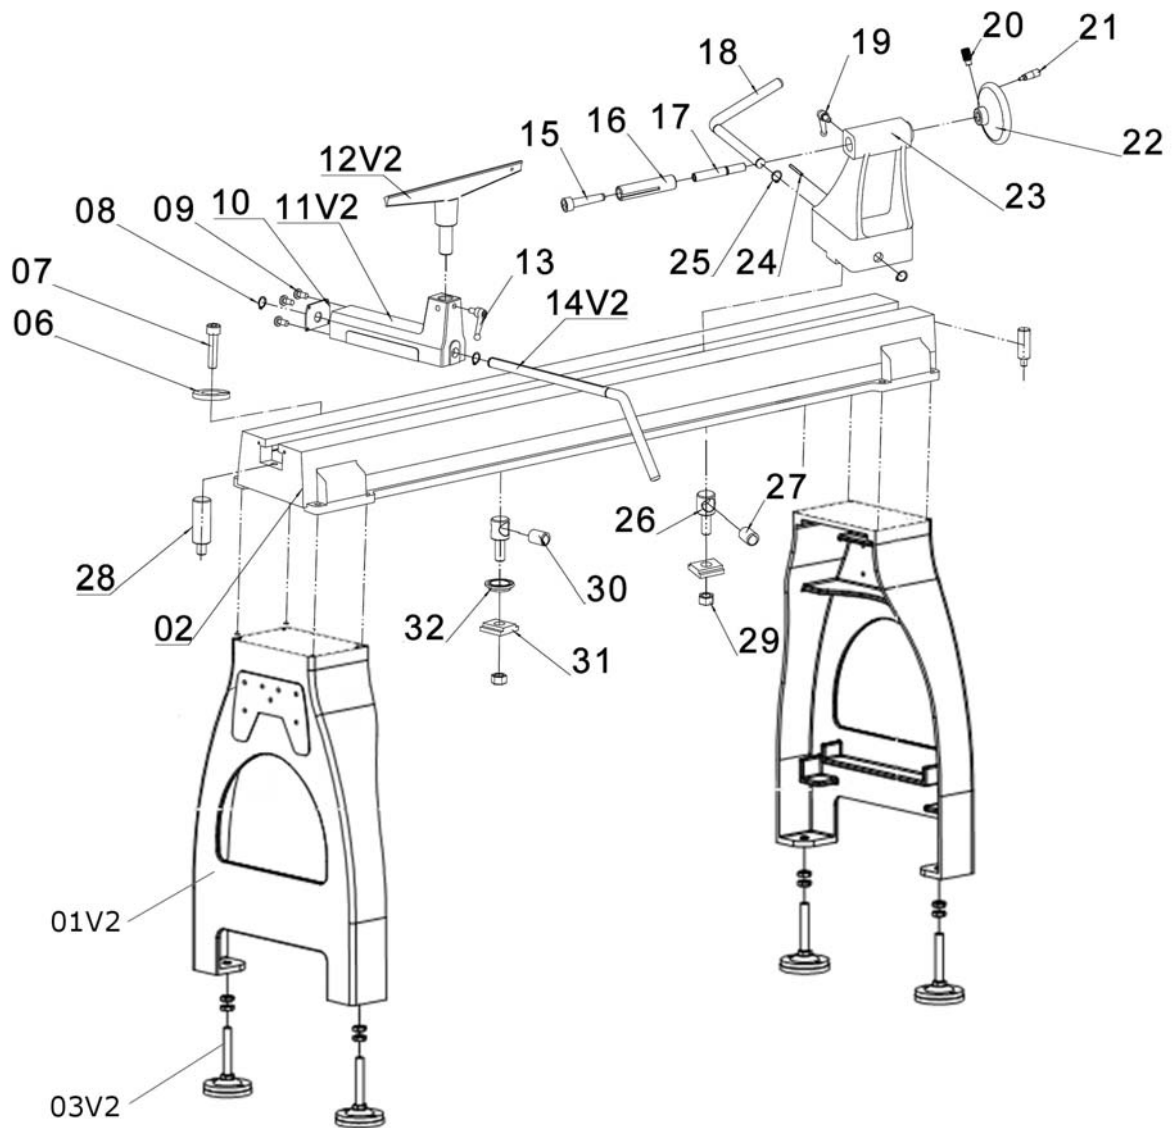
Spare parts drawing 2 Wood Lathe DB 1202 Vario
